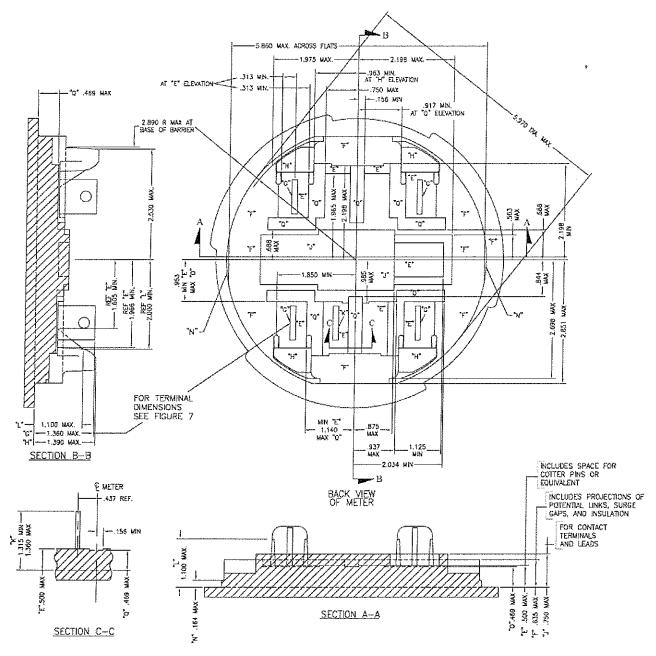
Envelope of surfaces that project into socket for 5-terminal meters in 7-terminal sockets
